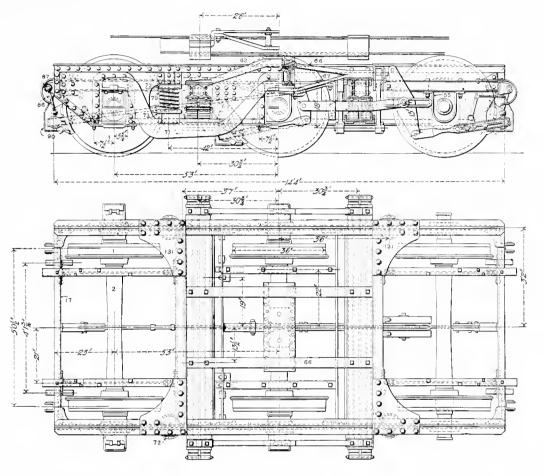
Details of Cast Steel Four-Wheel Passenger Truck. C., C., C. & St. L.
